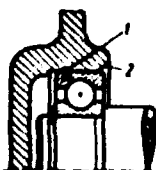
Jointing between ball bearing and housing by snap washer 1, easily to be assembled by character 2, but not to be disassembled /1/
